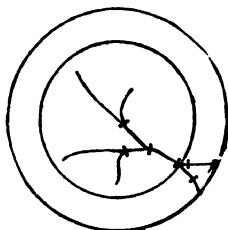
Arrangement of Rivets for V-piece Broken out of Plate.
